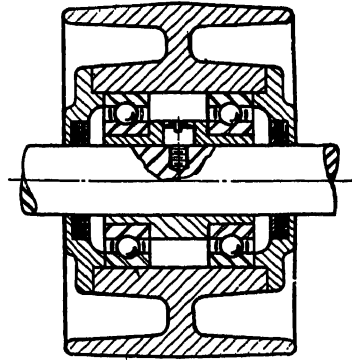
Idler or Loose Pulley Ball Bearing Application.
